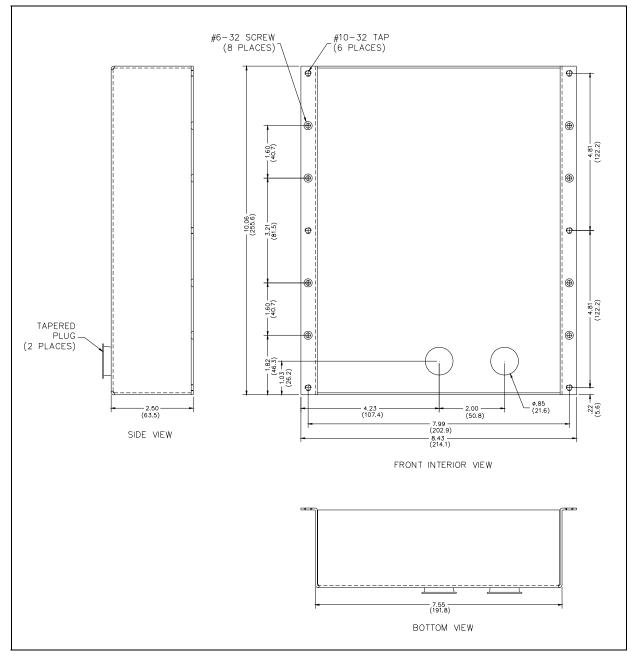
Model 397-001CAM and 398-001CAM Mounting Details
